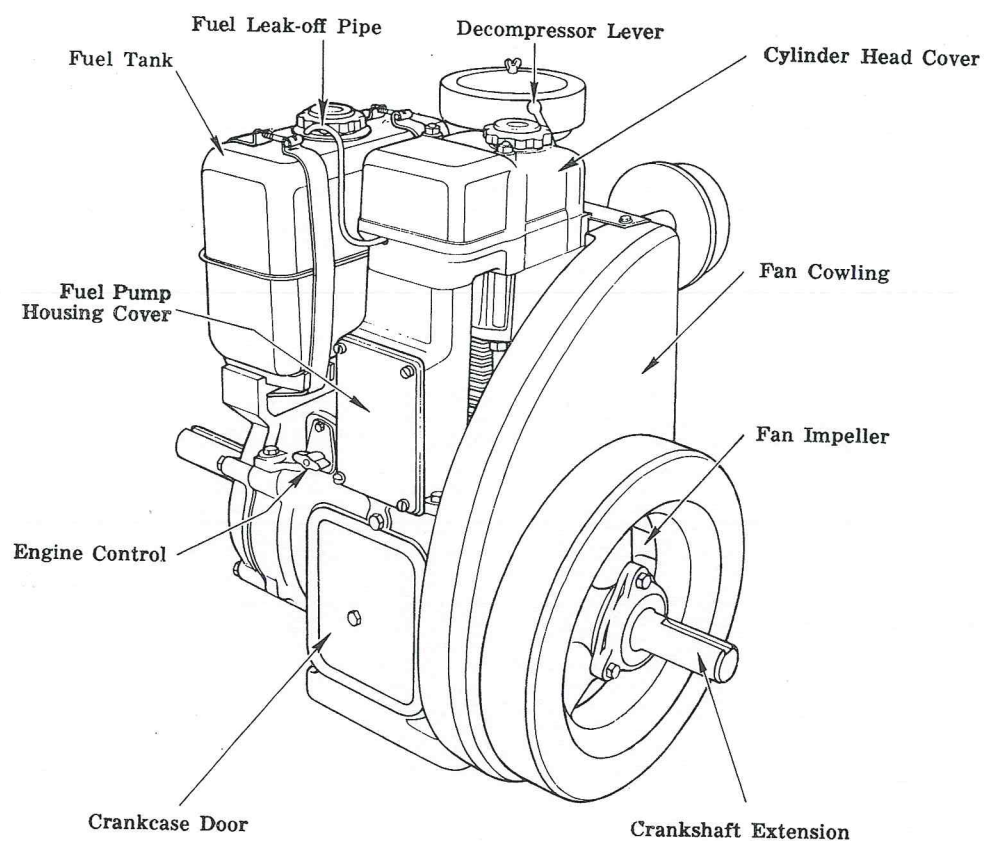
Type LD1 or SL1 Engine—Front View.
